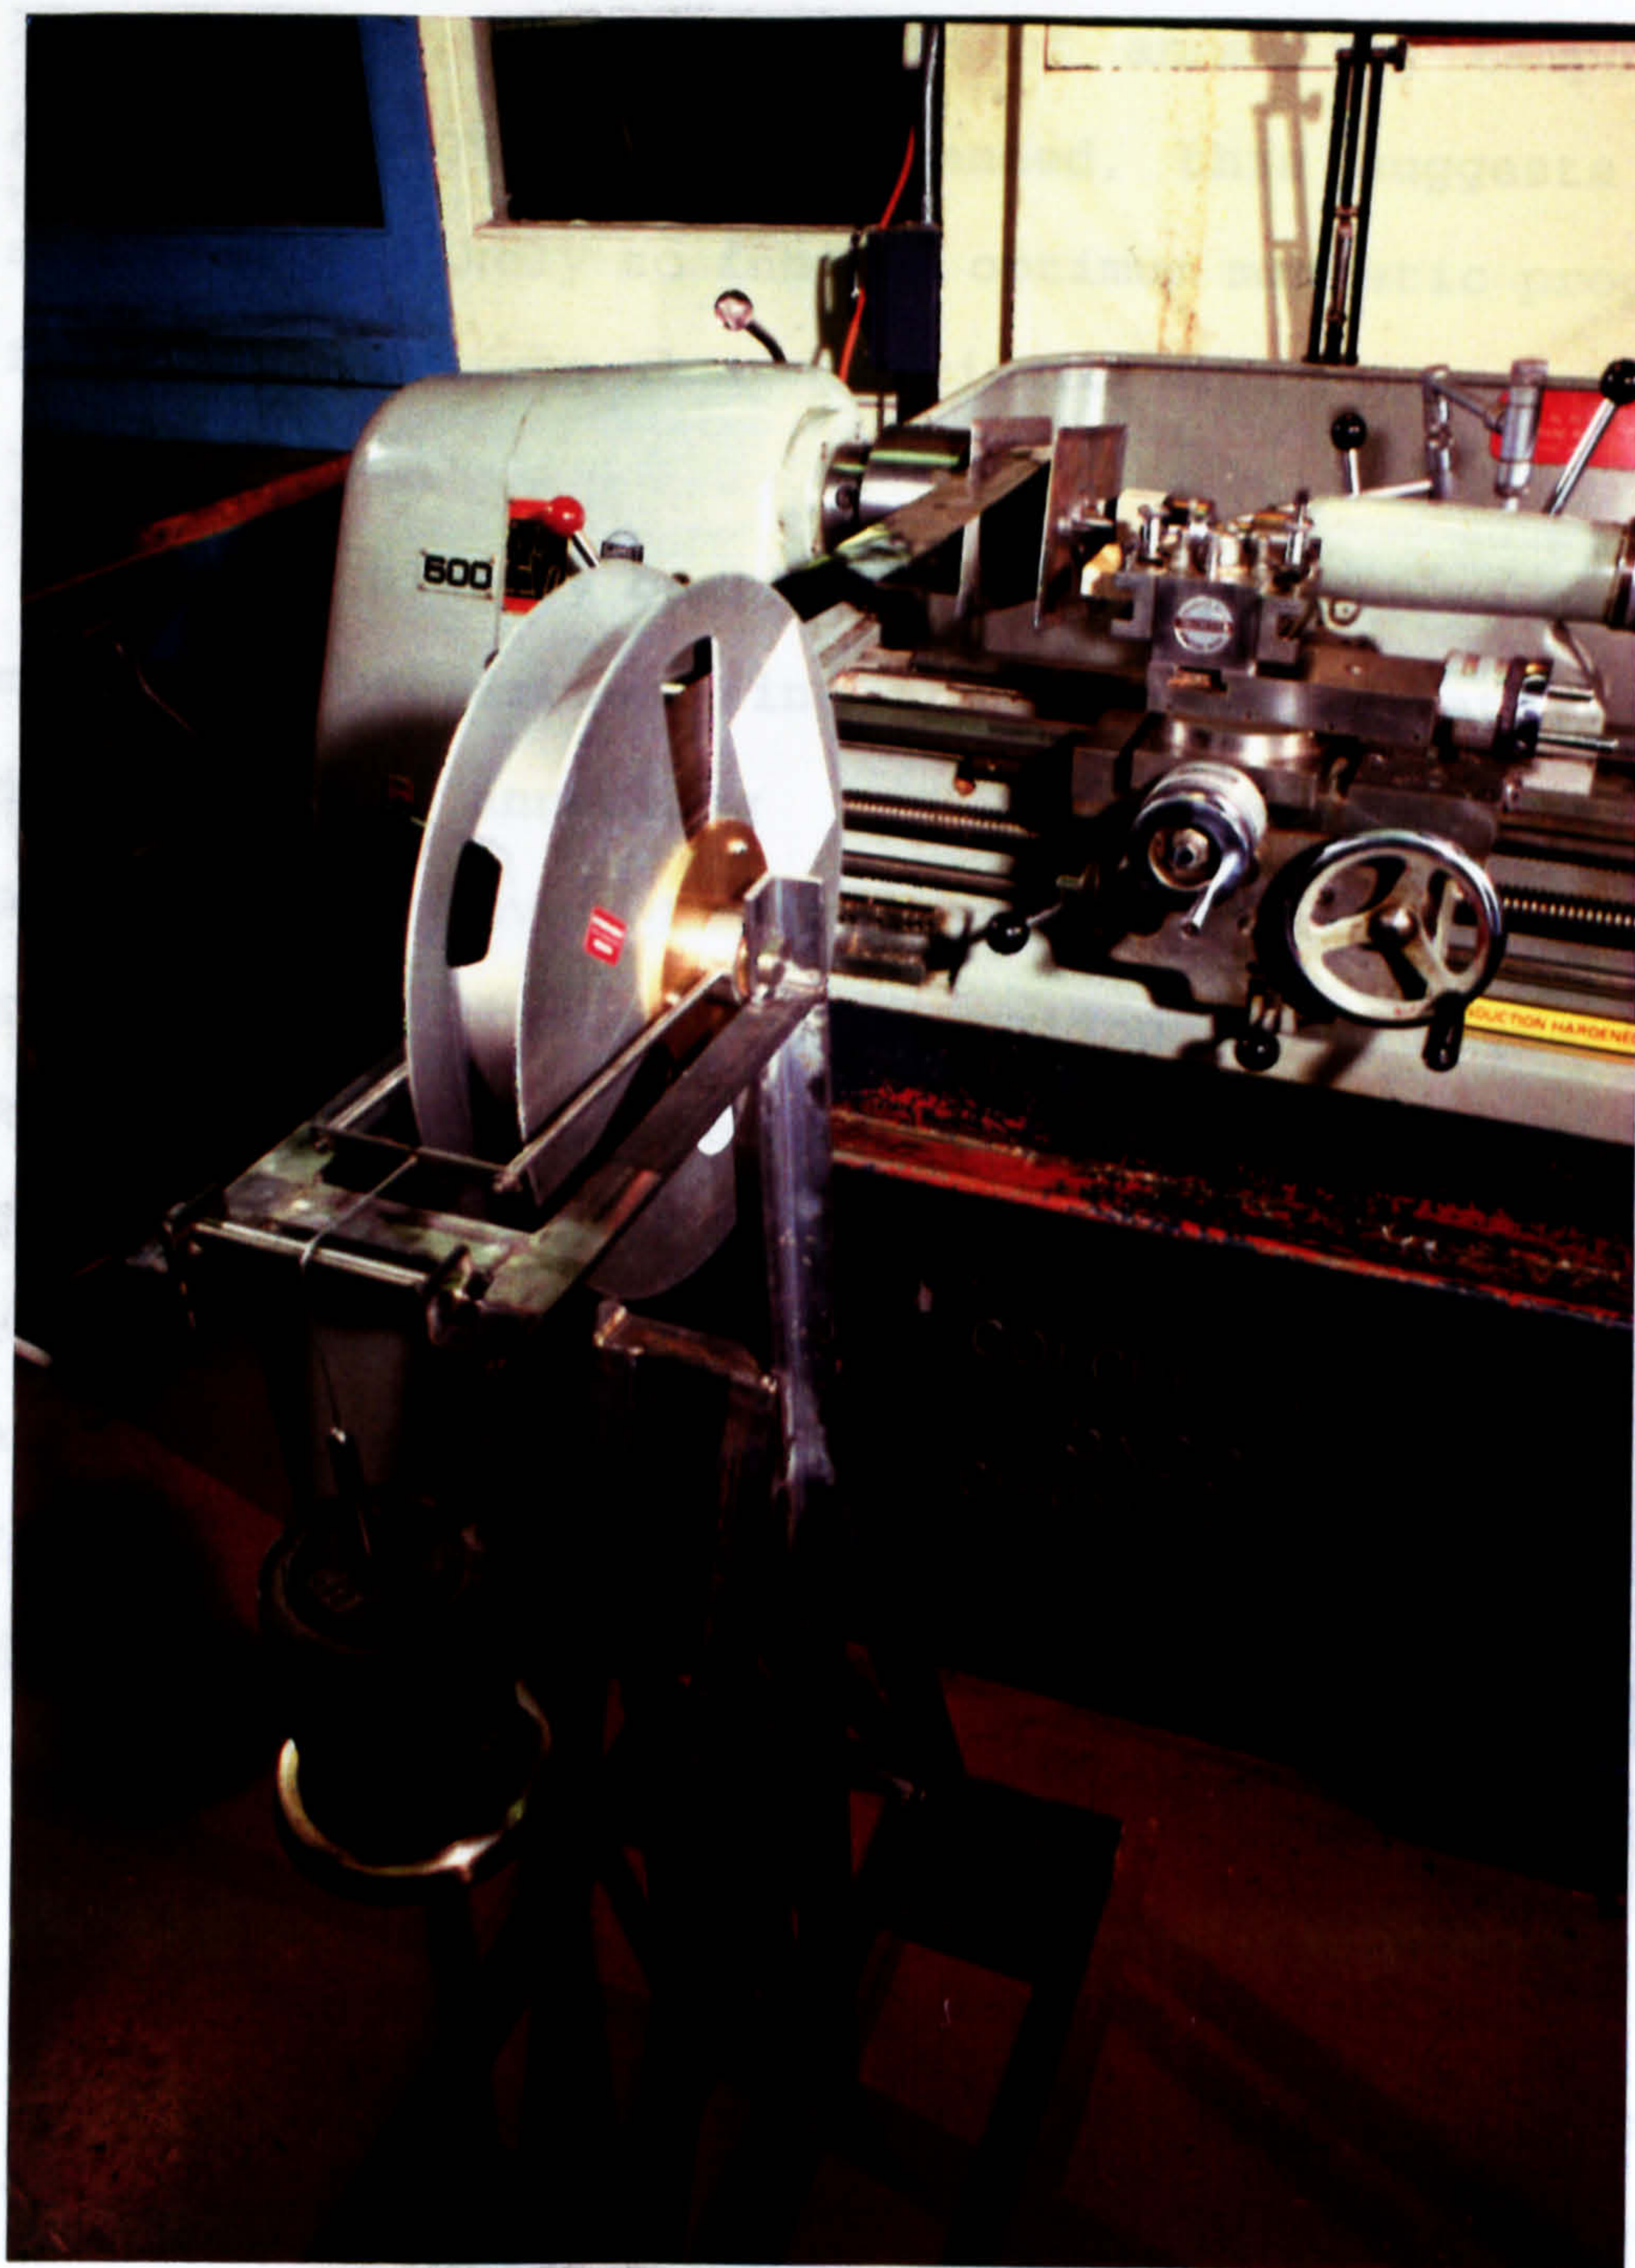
Winding ribbon onto lathe mounted mandrel from pay off onto spool.
